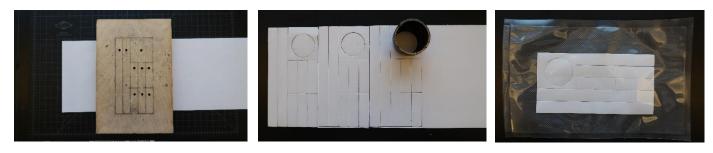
Fabricating electrodes. Left: die used to cut electrodes. Center: three sets of electrodes cut. Right: single set ready for leadwire attachment.
